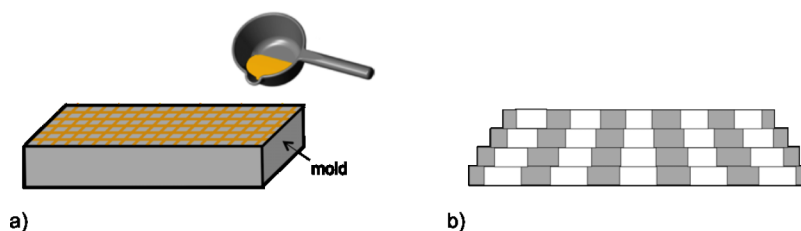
(a) Lead casting a parallel-hole collimator in a mold (b) stacking tungsten foils to produce a cone-beam collimator.
